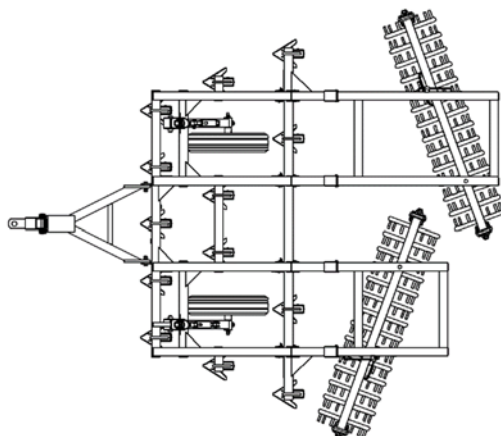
Layout diagram of a combined machine with a ring-bar roller
